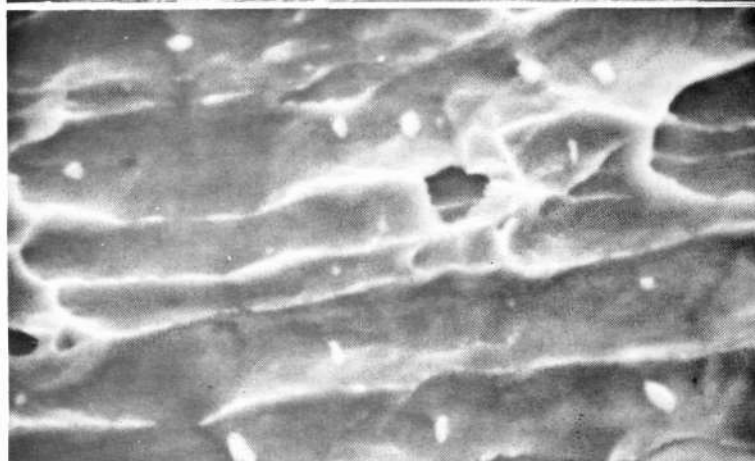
Scanning Electron Micrographs of Fracture Surface of GTA Weld Specimen 10 ; Fractured at -196°C (-320°F).
